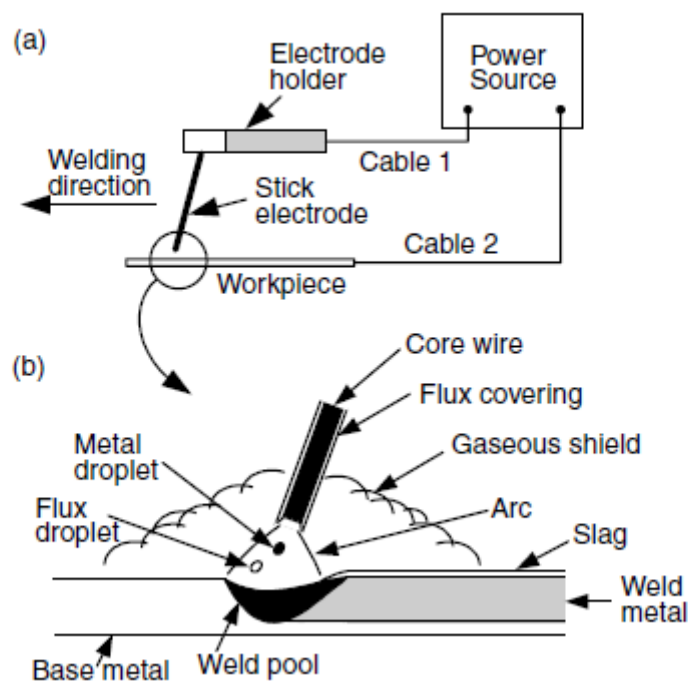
Schematic diagram of Manual Metal Arc welding [5]
